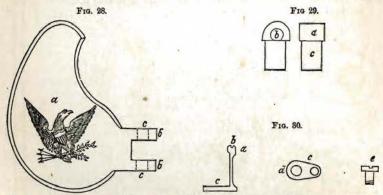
Magazine-cover, full size. a, body; b, b, jaws; c, c, holes for joint-pin.
